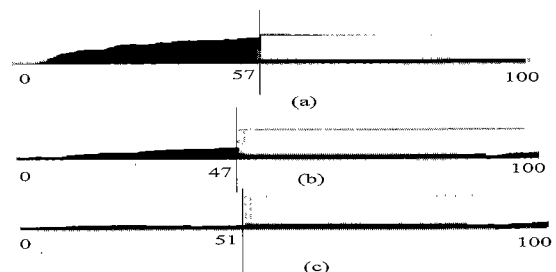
Examples of images of solder fillet and lead, where (a): good solder, (b): little solder, (c): no solder.
